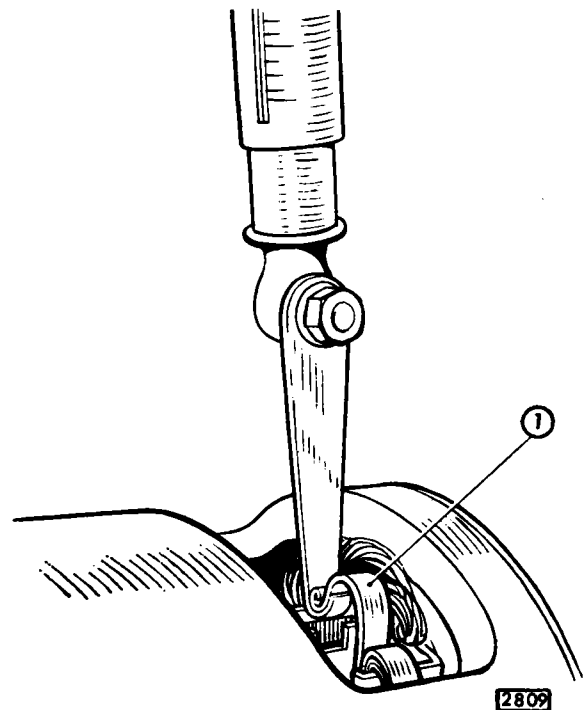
Testing the brush spring tension. Brush spring indicated.
